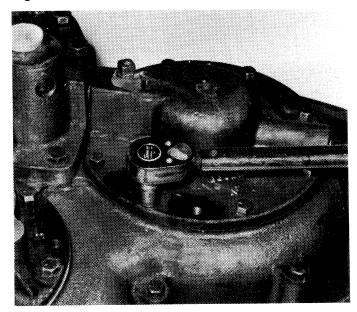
Removing or Installing Screws on Forward Shaft Collector.
